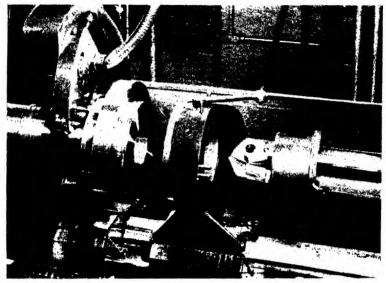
Guiding a boring bar for heavy work in a turret lathe.
